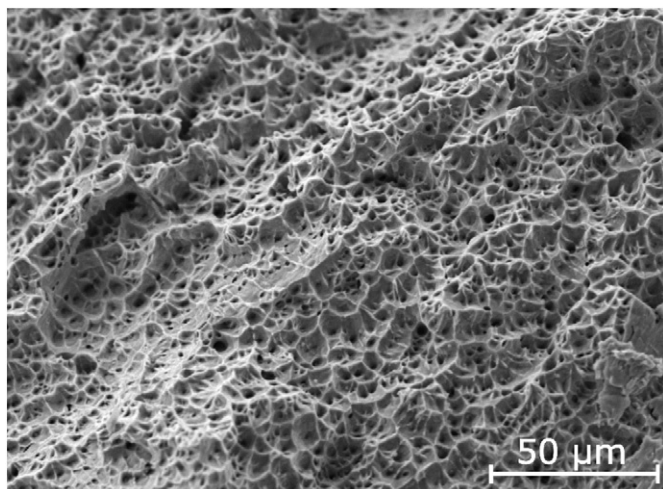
Fracture surface of the gas tungsten arc welded CrMnFeCoNi high entropy alloy.
